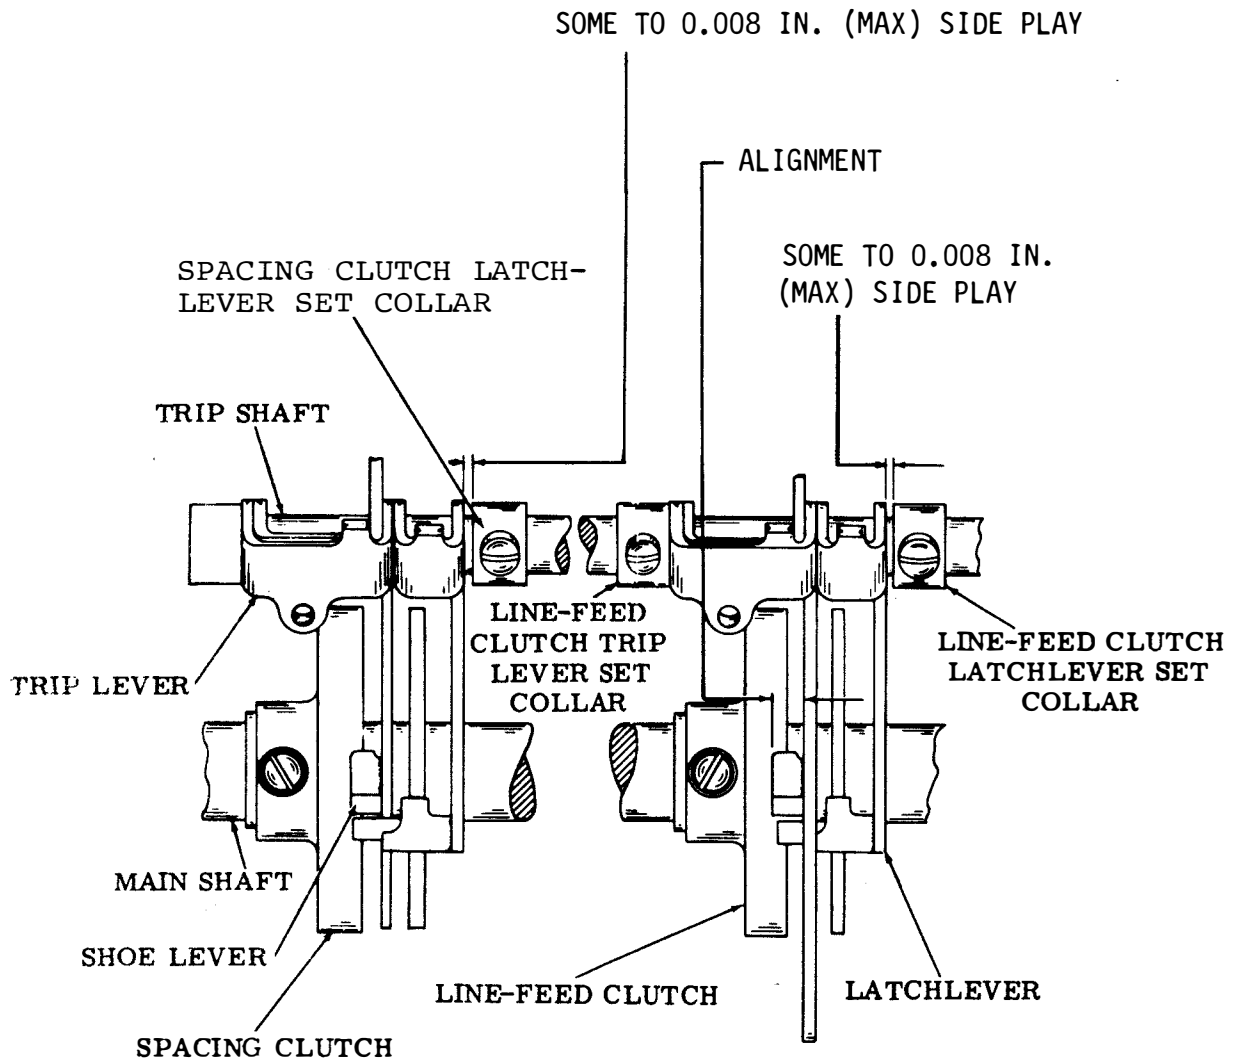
Clutch Trip Shaft Set Collars, Rear View
